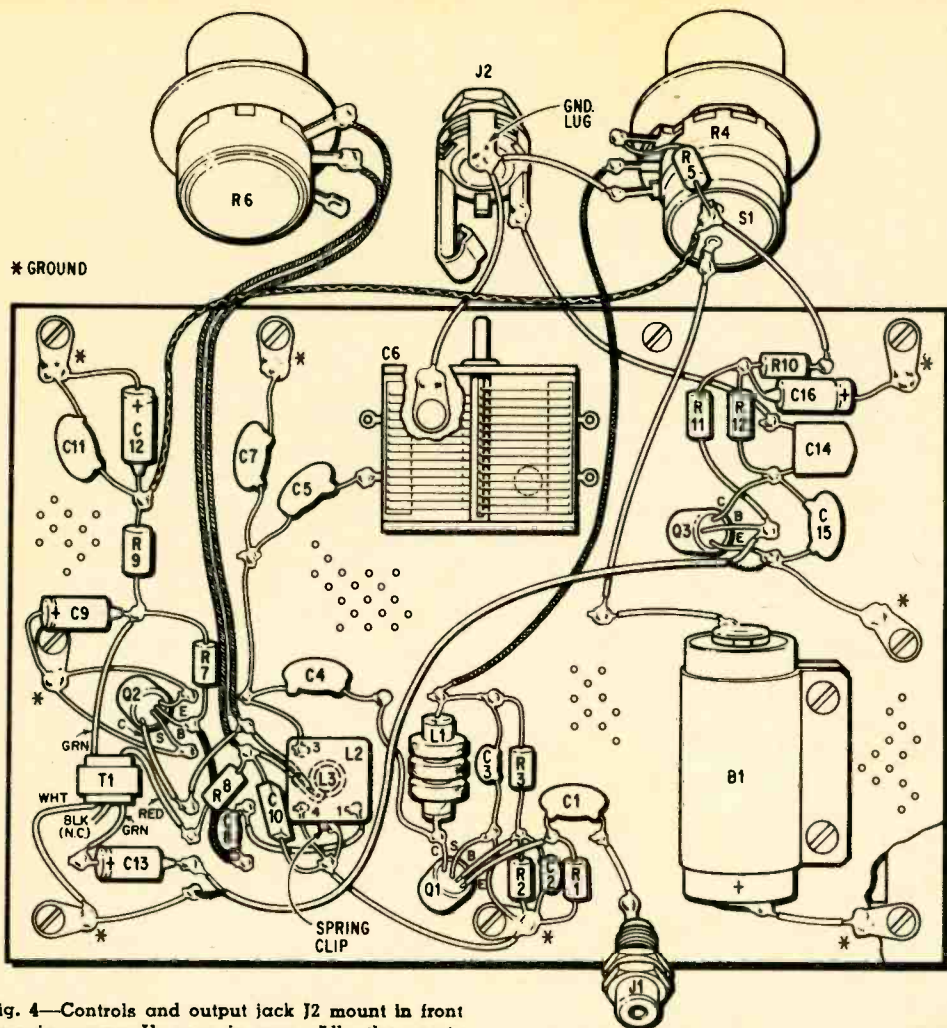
Controls and output jack J2 mount in front chassis apron; J1 goes in rear. All other parts mount on board. Twist leads from R6 (under board) to R8.L3. Mount lugs marked (*) on chassis lip.
